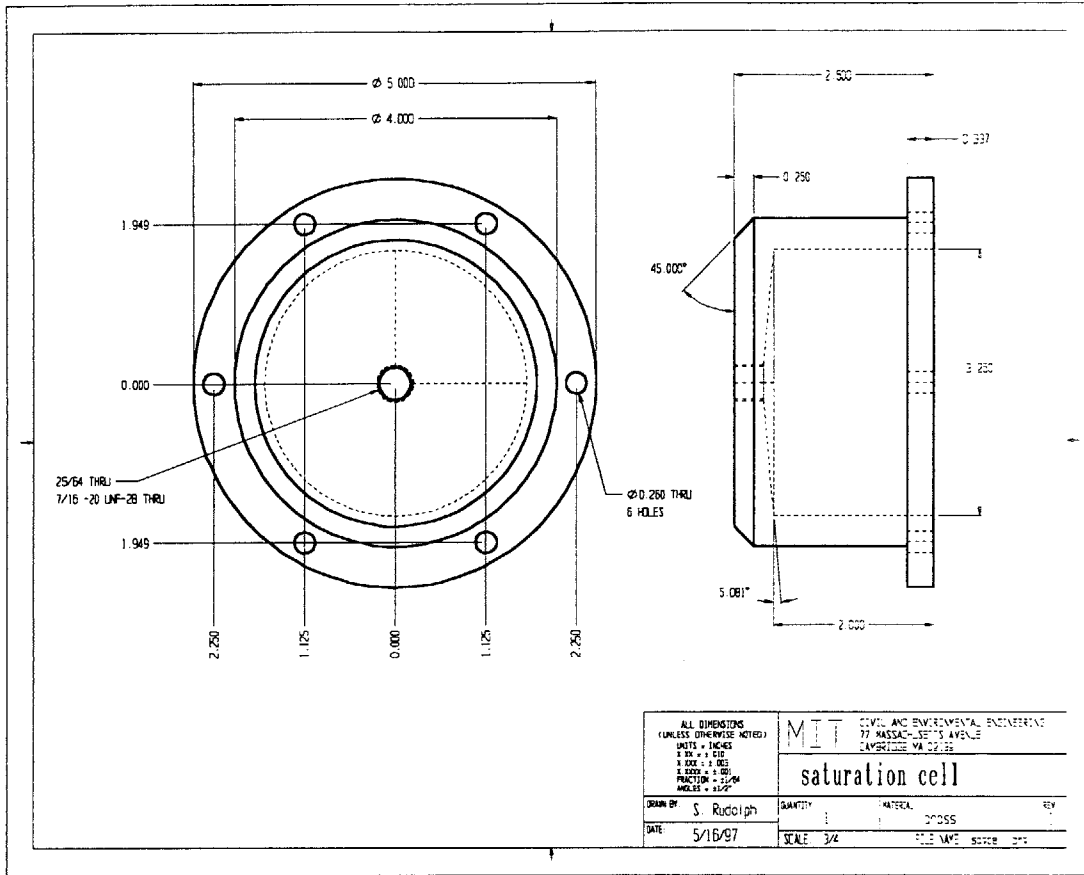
Mechanical drawing of saturation chamber (from Rudolph).
